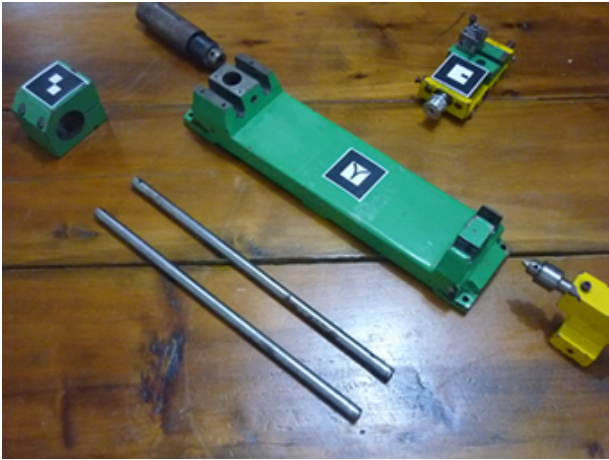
Photograph of the milling machine disassembled and ready to perform a training session using AR. Some parts have patterns attached.
